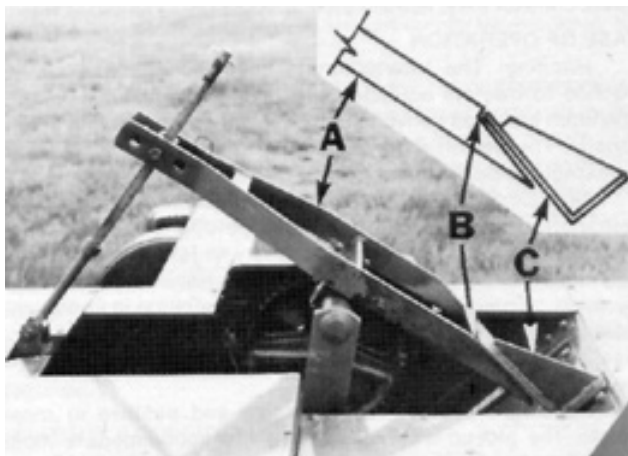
Packer Finger and Deflector Plate Interference: (A) Packer Finger, (B) Raised Saw Cut Edge, (C) Deflector Plate.
